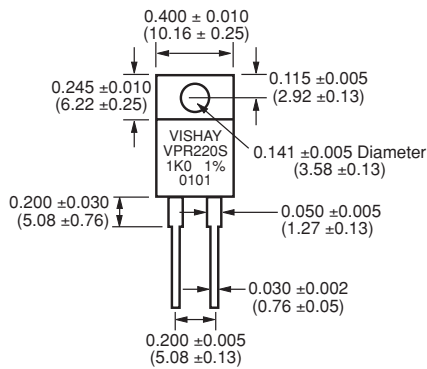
VPR221S DIMENSIONS in inches (millimeters)
